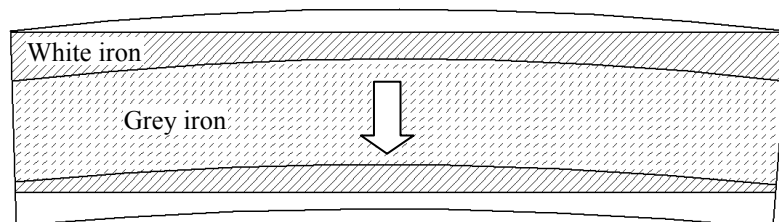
Bent casting machined with the roll centre true running (SHW 2005).
